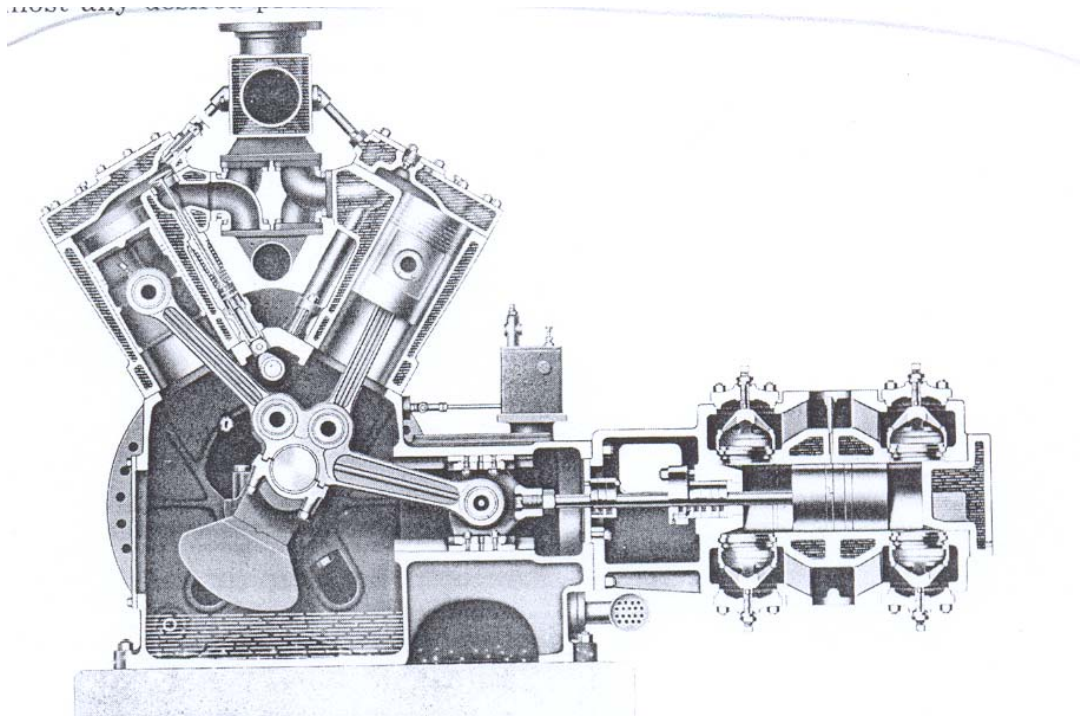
A “V”-angle arrangement of an integral gas-engine driven compressor. Also built as an “L” design with engine cylinders vertical. 120 to 5500 HP.
